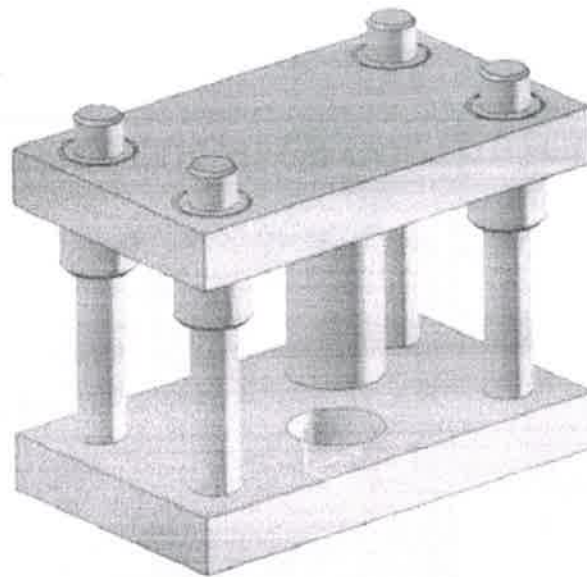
The completed Press Tool assembly after assembling the Top Plate with the assembly
